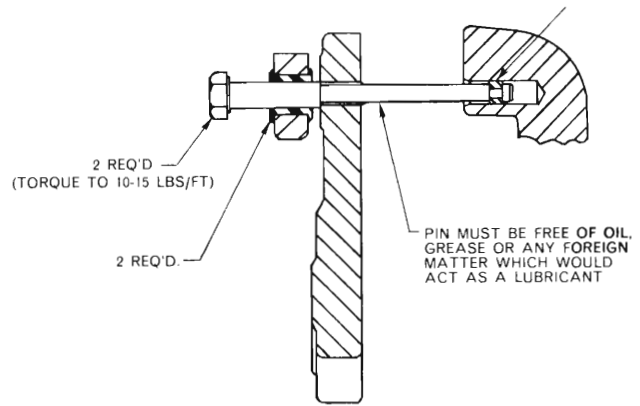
Caliper assembly head retaining bolt (sectional view)
